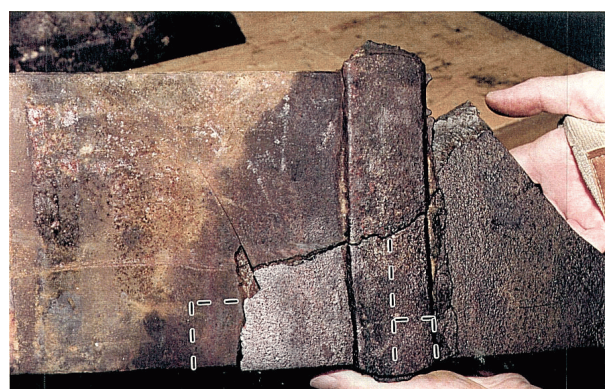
Bottom view of rail base showing location of fracture and thermite weld
